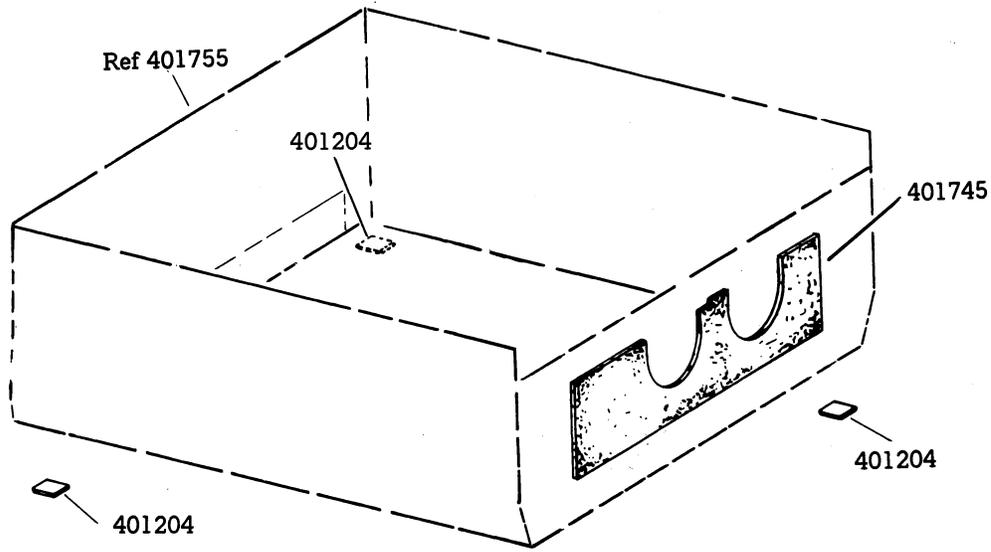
40CAB201/ZZ Printer Cabinet Core for Adjacent or RO Friction Feed Printer (Cont)
